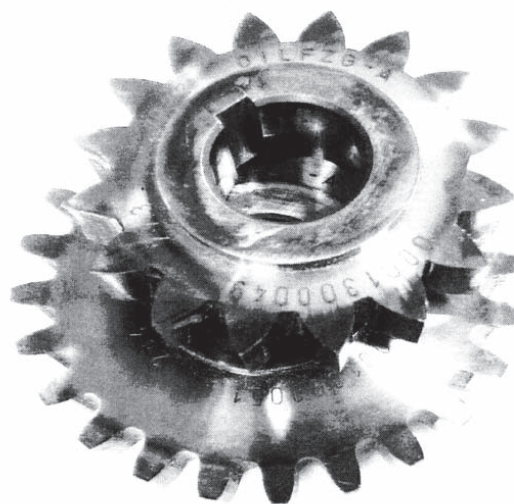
Discoloured gears (the pinion is placed on top of its matching gear).
